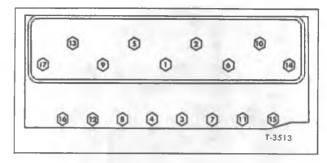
Cylinder Head Bolt Tightening Sequence on 350 V-8 Engine
